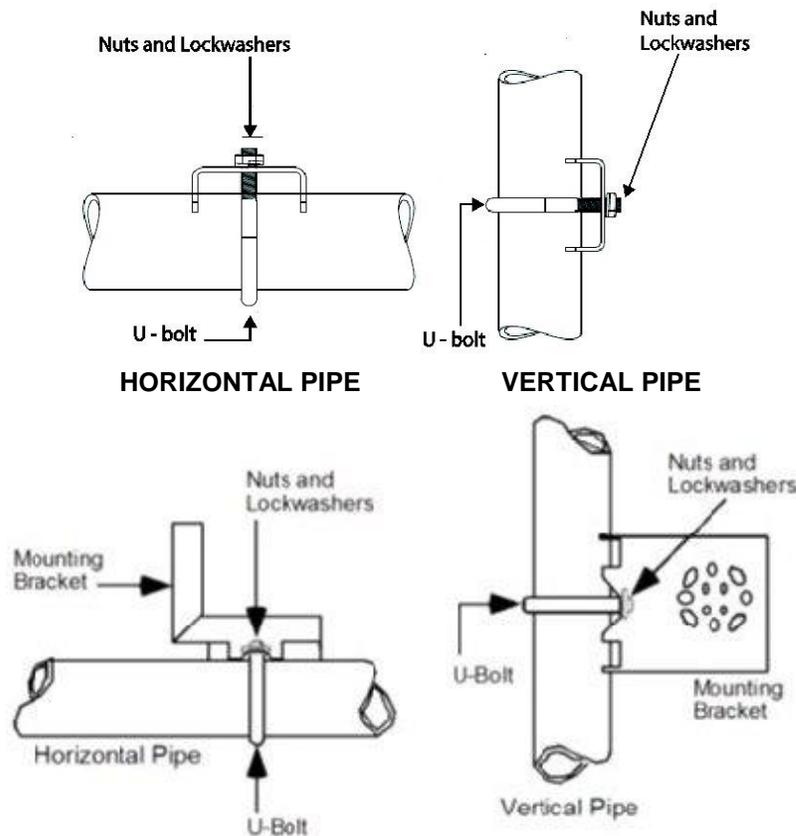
Pipe Mounting Bracket Secured to a Horizontal or Vertical Pipe
